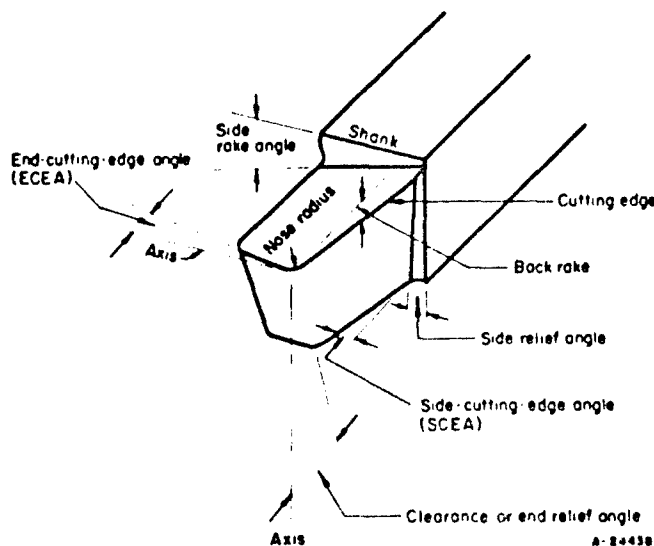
NOMENCLATURE FOR SINGLE-POINT CUTTING TOOLS
